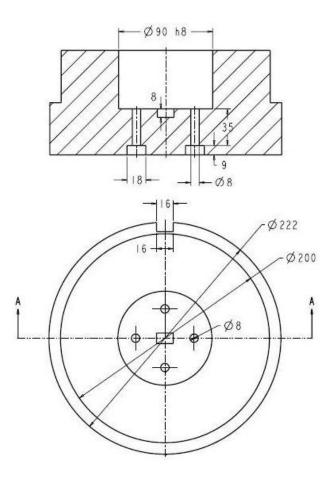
Technical Drawing of the Lower Coining Supporting Die
